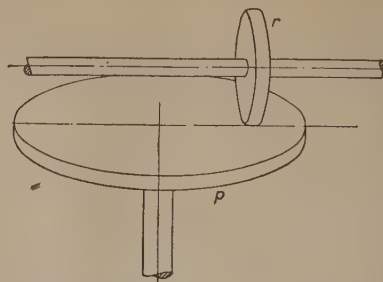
Infinitely variable gear in which a friction roller is moved edgewise to and fro on a disk.
